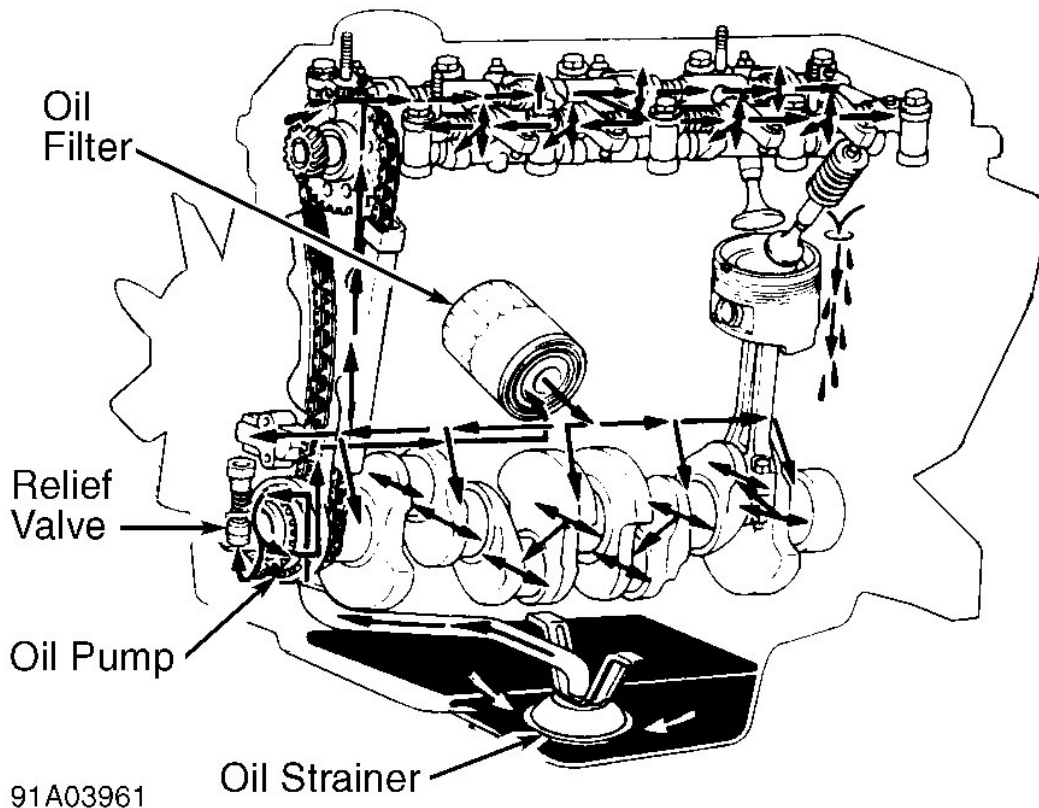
Cross-Sectional View of Engine Oil Circuit
